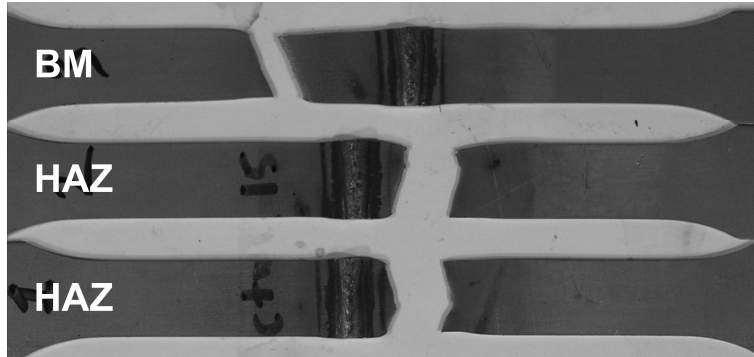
The low heat input (TB117) weld tensile specimens from the 1.20 mm DP600 '22s' sheet steel are shown after they were loaded to fracture. The weld was observed to have a mixed failure mode.
